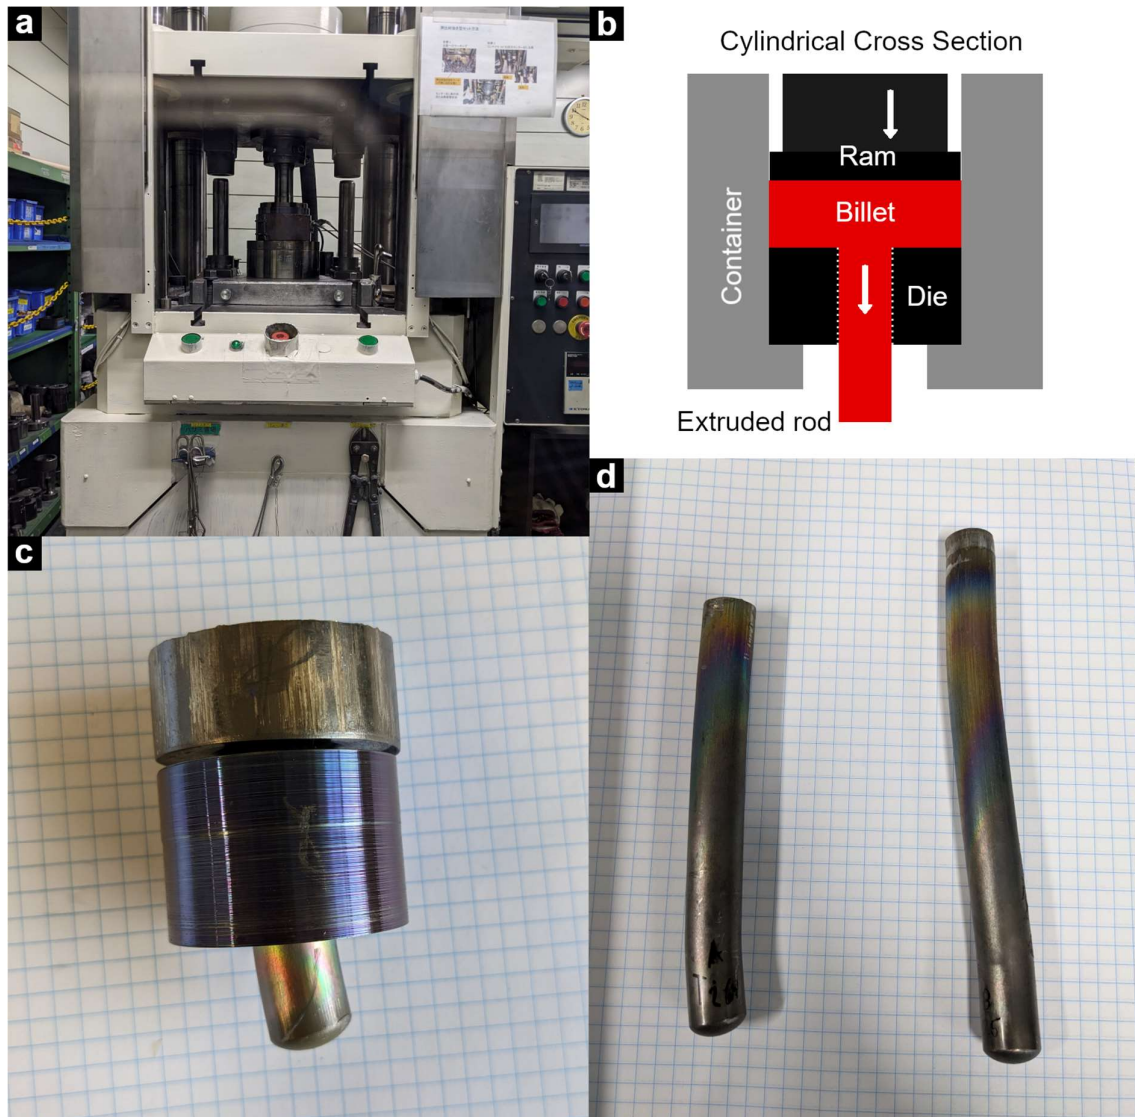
Hot extrusion. a) the hydraulic press, b) a schematic of hot extrusion, c) a partially extruded billet with die, d) fully extruded rods.
